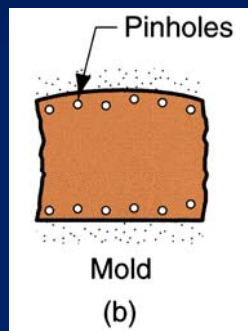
Common defects in sand castings: (b) pin holes
